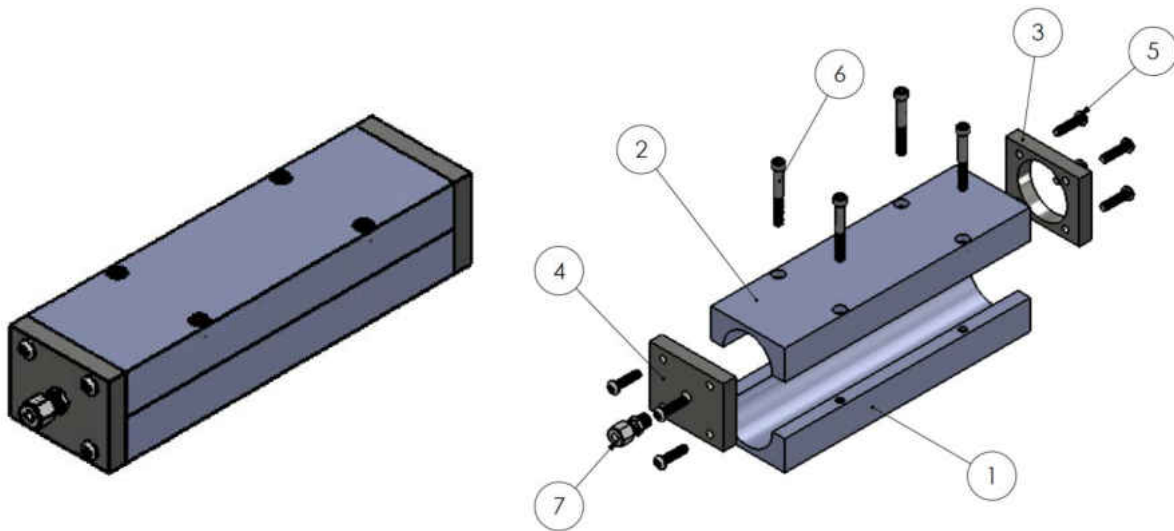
Shaded drawings of the assembled burner casing with exploded view
